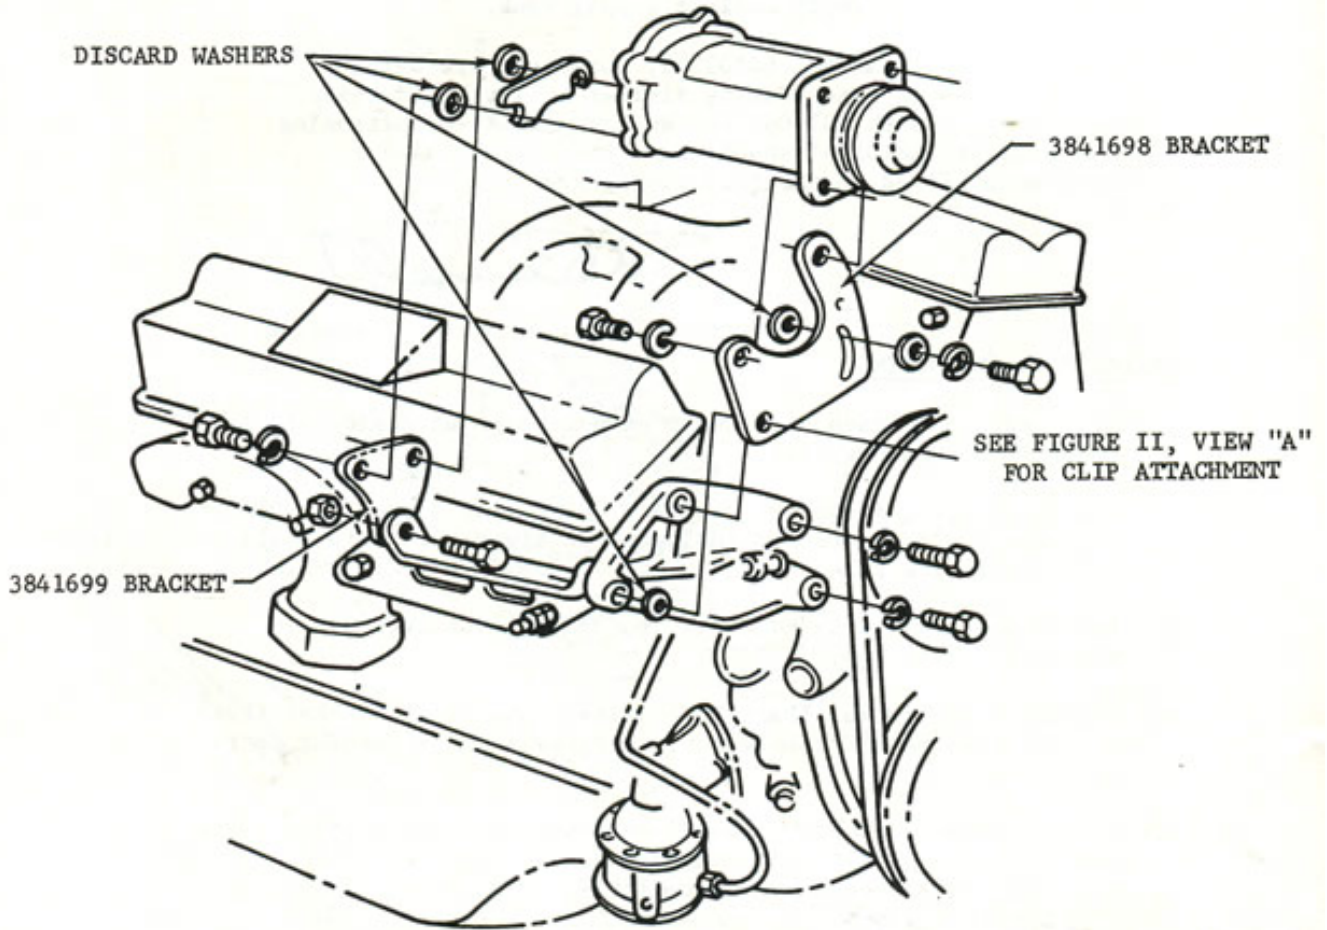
FIGURE I - A/C COMPRESSOR BRACKET MOUNTING
